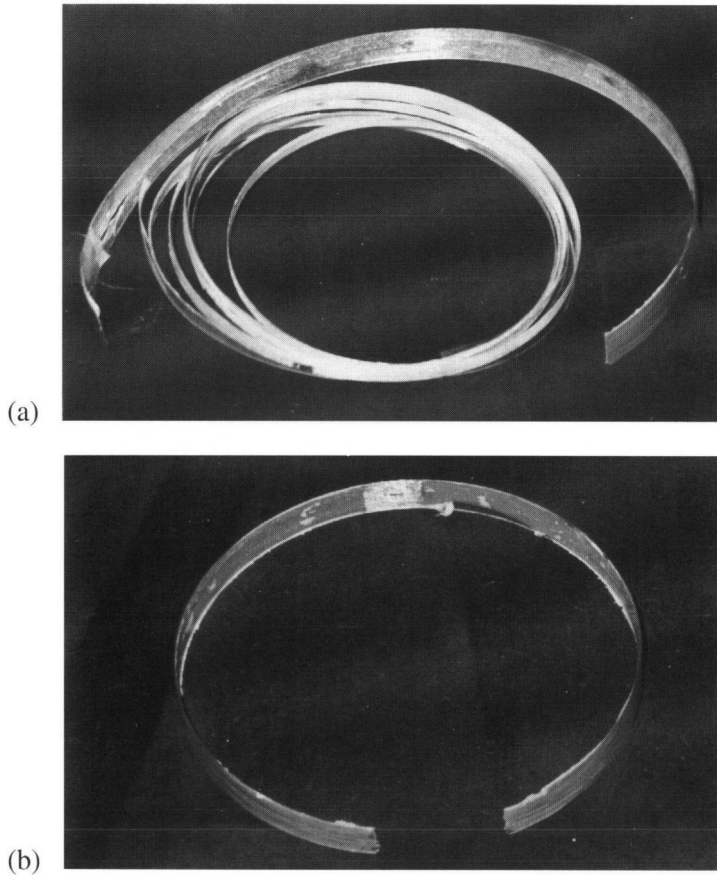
Photographs of fractured specimen appearance. (a) Specimen with shorter teflon sheet (Type N/T80-3). (b) Specimen with longer teflon sheet (Type N/T300-3).
